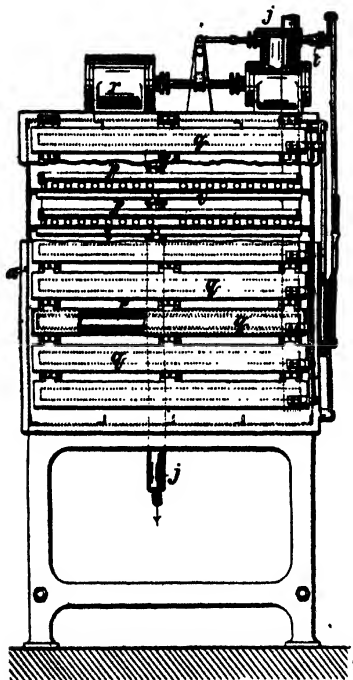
Steam-heated Vacuum Tea Drying Machine, with Sliding Shelves or Trays (sectional front elevation).
